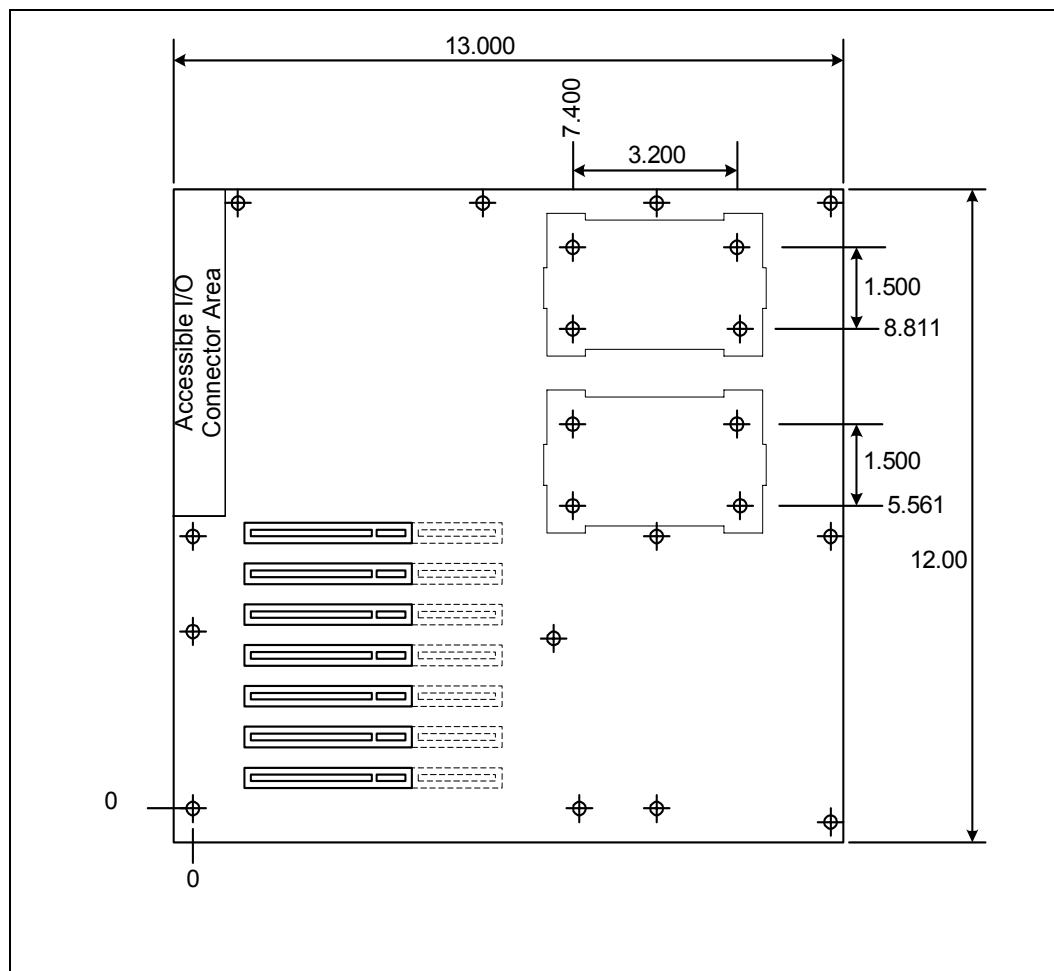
Available Baseboard Mounting Holes supported by the Chassis
